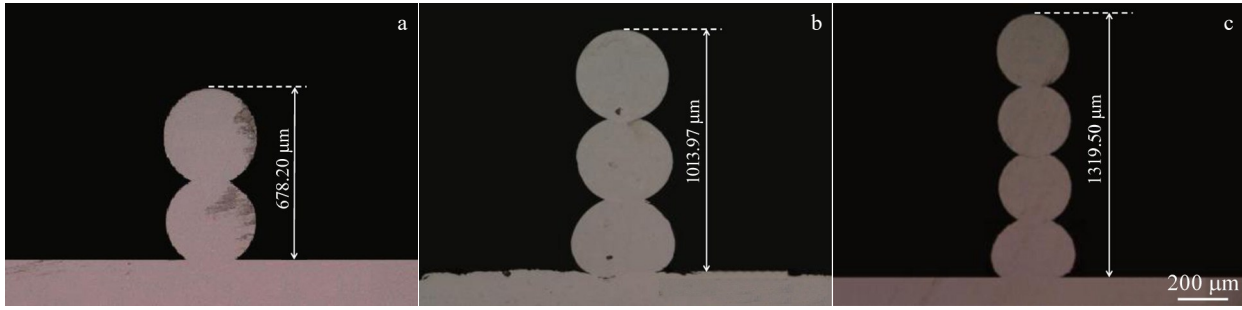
Cross-section fusion appearances of single-channel 2-layer (a), single-channel 3-layer (b), and single-channel 4-layer (c) samples
